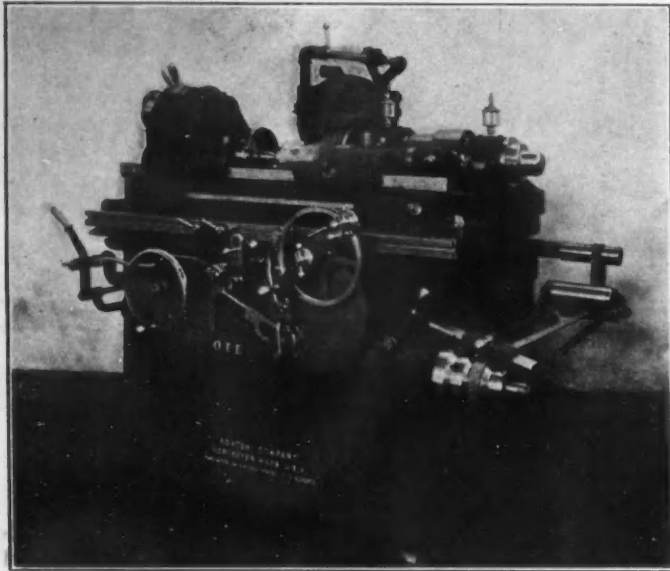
MACHINE EQUIPPED WITH A SPECIAL ADJUSTABLE-SPEED LIVE-SPINDLE HEADSTOCK GRINDING PISTONS
